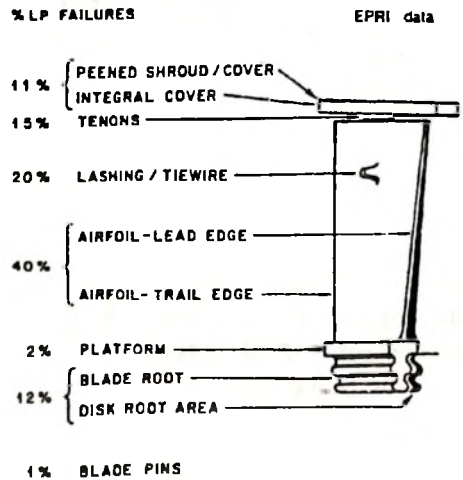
Location of LP turbine blade failures [10-13].
